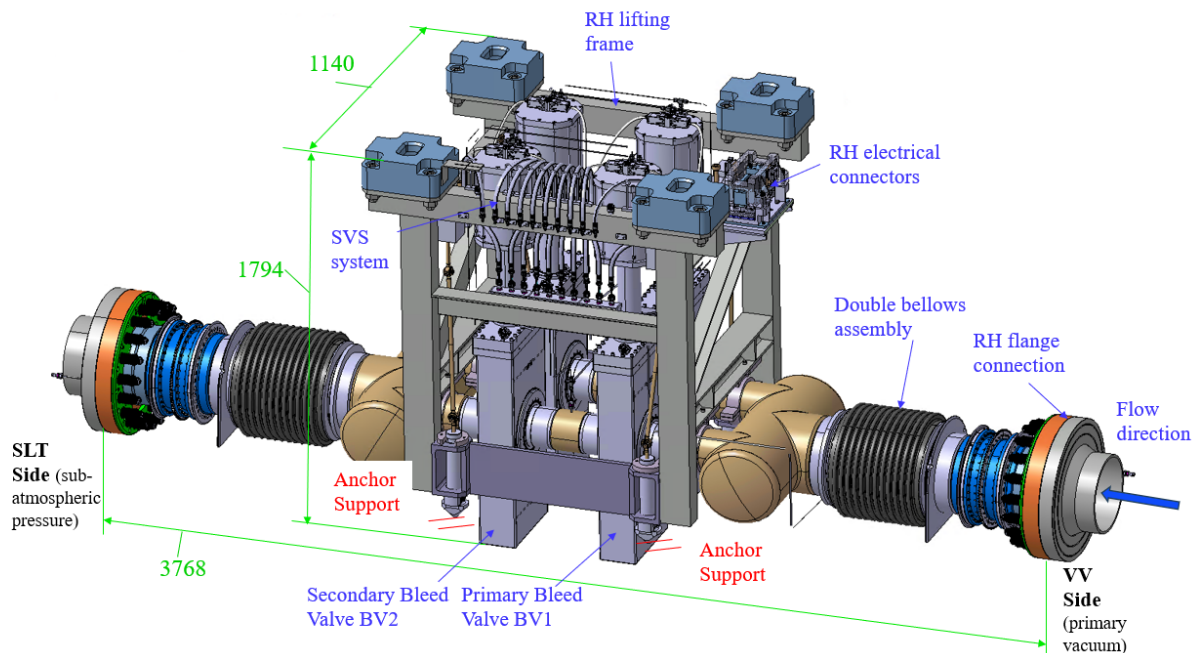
Preliminary VVPSS Bleed Valve Assembly (without housing or supports for clarity)
